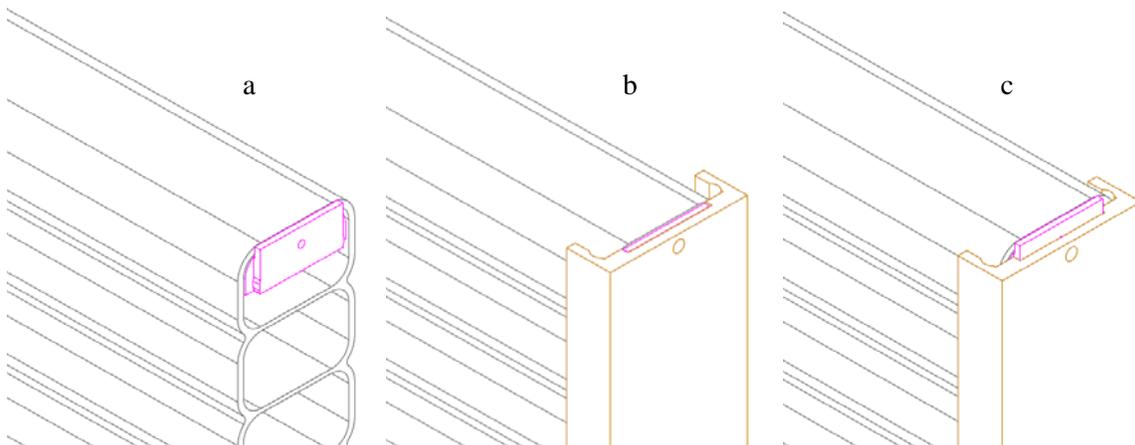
Side seal function. (a) shows a side seal installed in the first or last cell of the extrusion assembly so that it is flush with the edge. (b) shows the relationship of the end plate, side seal, and extrusion assembly edge if the extrusion assembly is its minimum acceptable width. Here the side seal, the end plate, and the edge of the extrusion assembly are flush. (c) shows the relationship of the end plate, side seal, and extrusion assembly edge if the extrusion assembly is its maximum acceptable width. Here the side seal and the edge of the extrusion assembly are flush. Even though the end plate does not extend for the entire width of the extrusion assembly, the side seal still provides an ample seal surface with the end plate.
